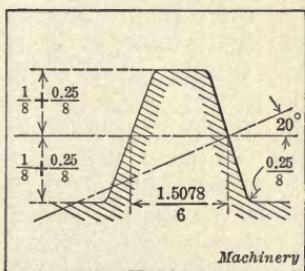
Hob Tooth for a 6/8 Pitch Fellows System Stub Gear Tooth
